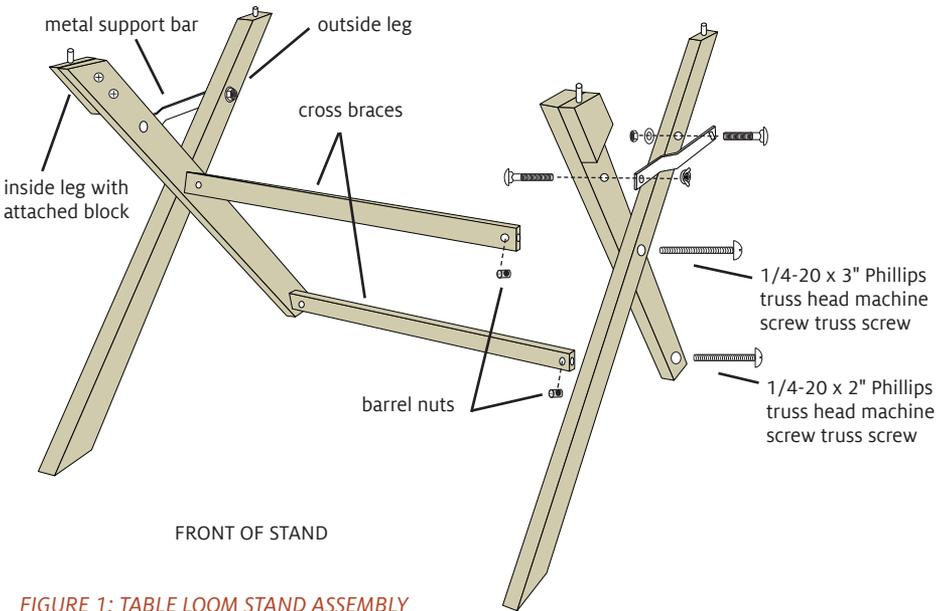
TABLE LOOM STAND ASSEMBLY
